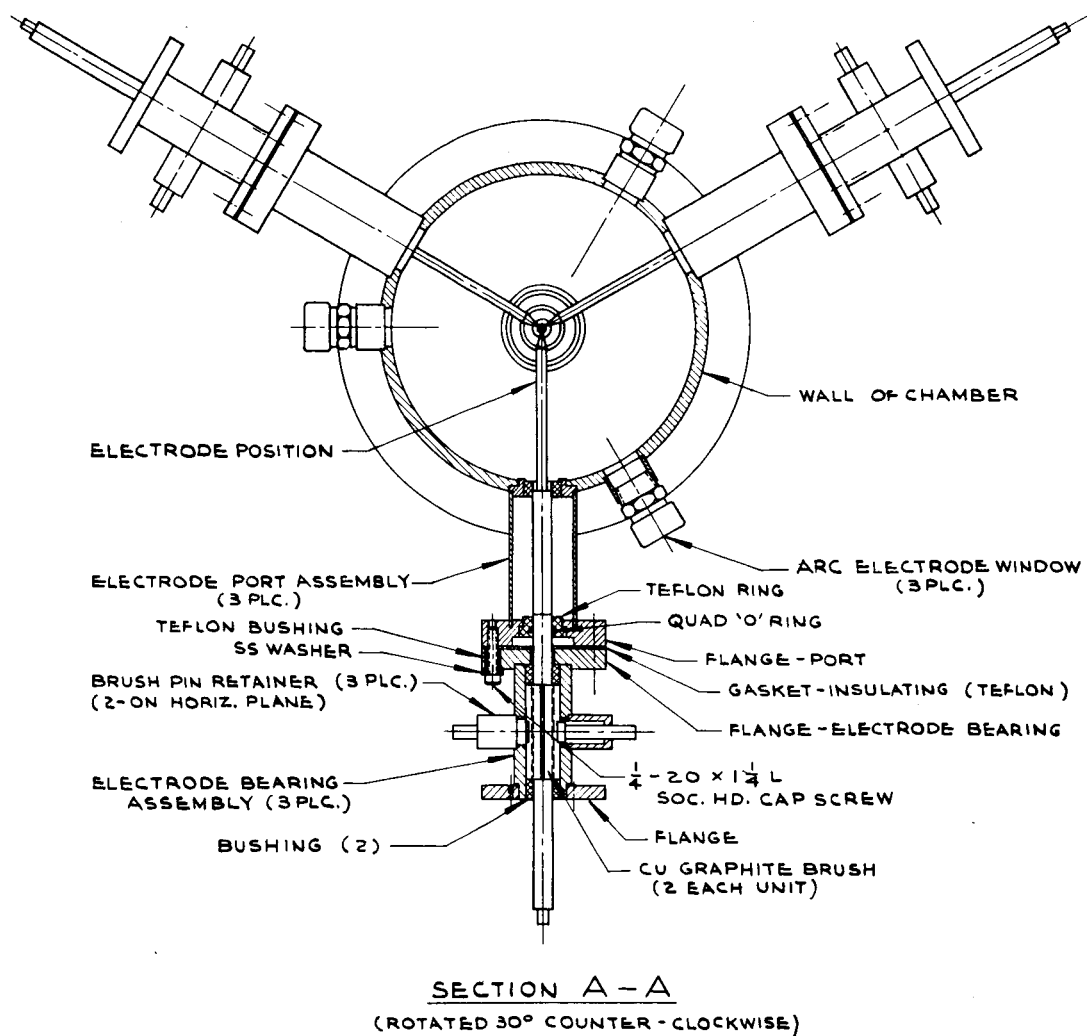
TOP SECTION VIEW OF ARC-VERNEUIL FURNACE MOD 2 ASSEMBLY SHOWING THREE HORIZONTAL ELECTRODES
